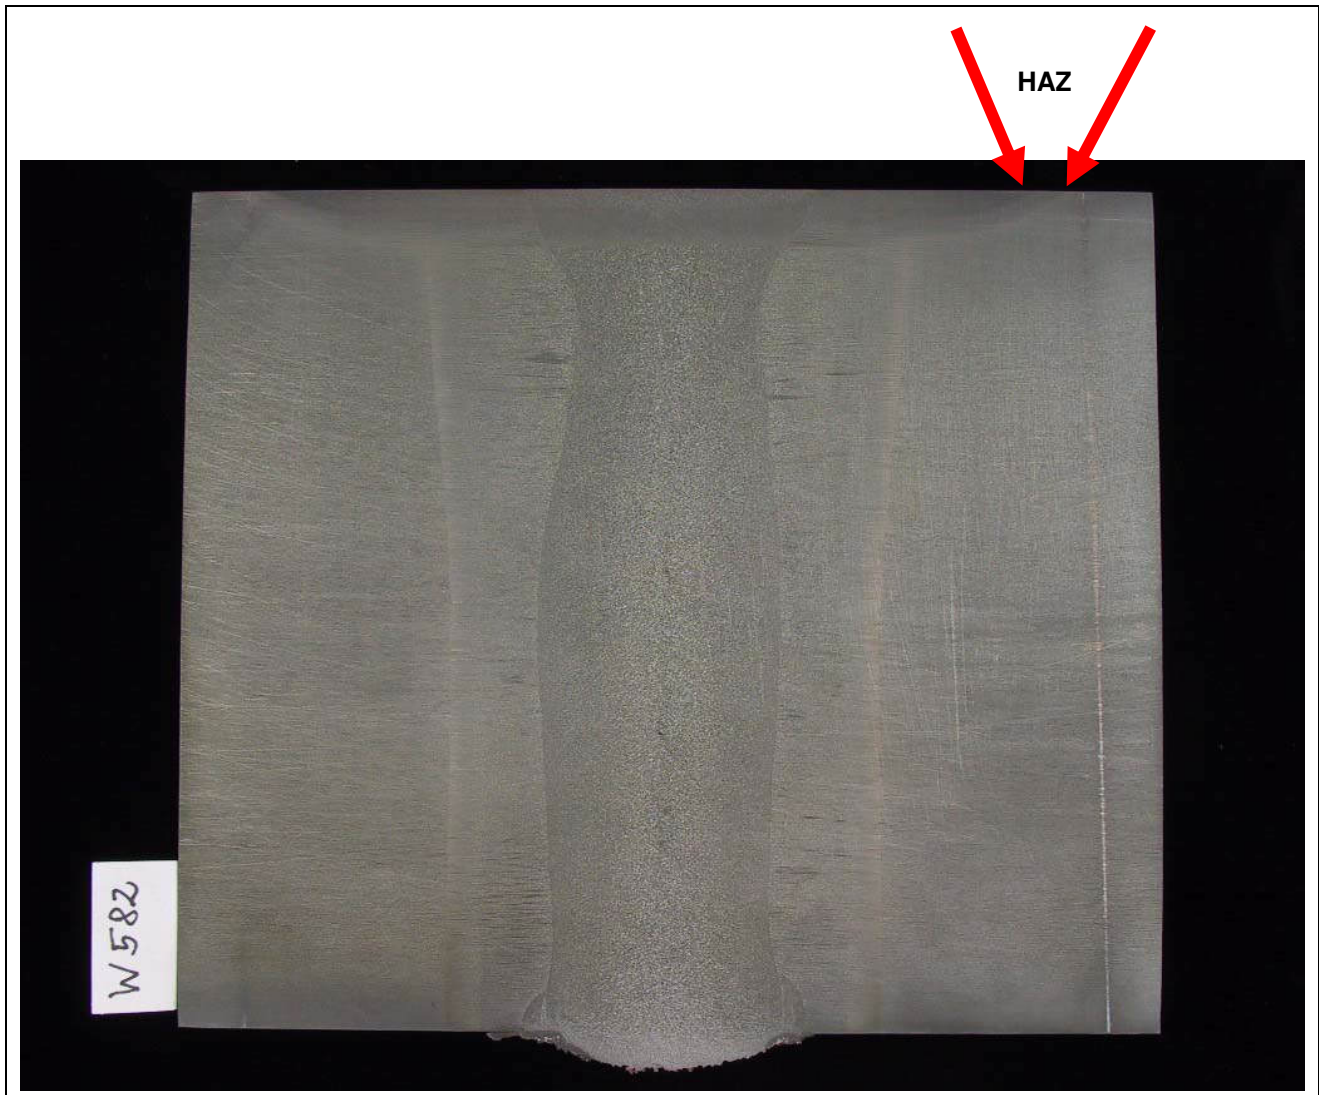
Longitudinal Section of SkV-Weld With Additional HC-Treatment
